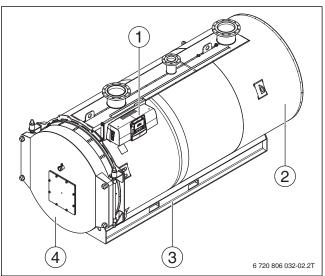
Uni 3000 F oil/gas boiler for the boiler output 1040 to 1850 kW
